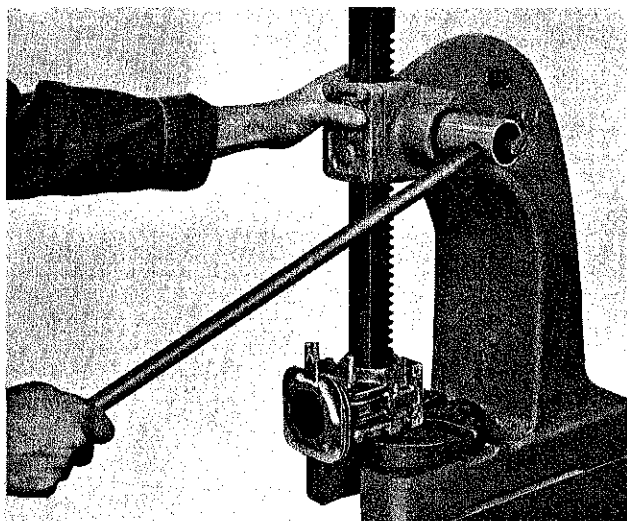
Using an arbor press and a bearing driver to remove the crankcase needle bearing and oil seal.
